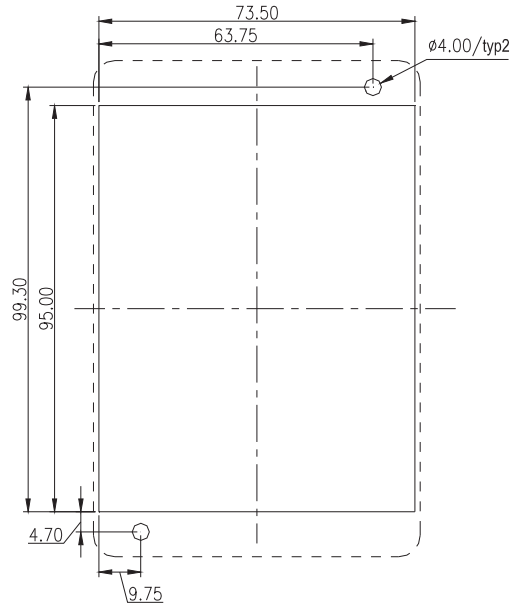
Schematic Diagram for Mounting Hole Dimensions of External Keyboard
